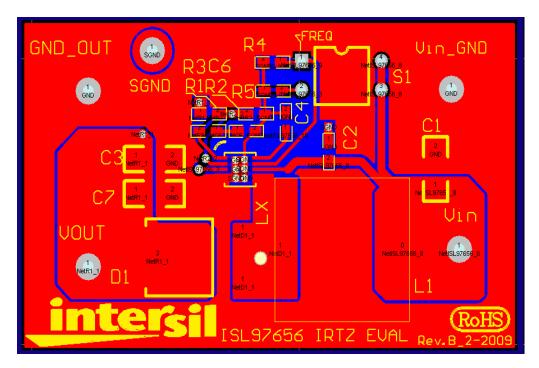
EVALUATION BOARD ASSEMBLY LAYER
